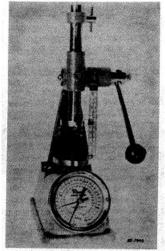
Checking Clutch Pressure Springs on SE-2241 Tester
